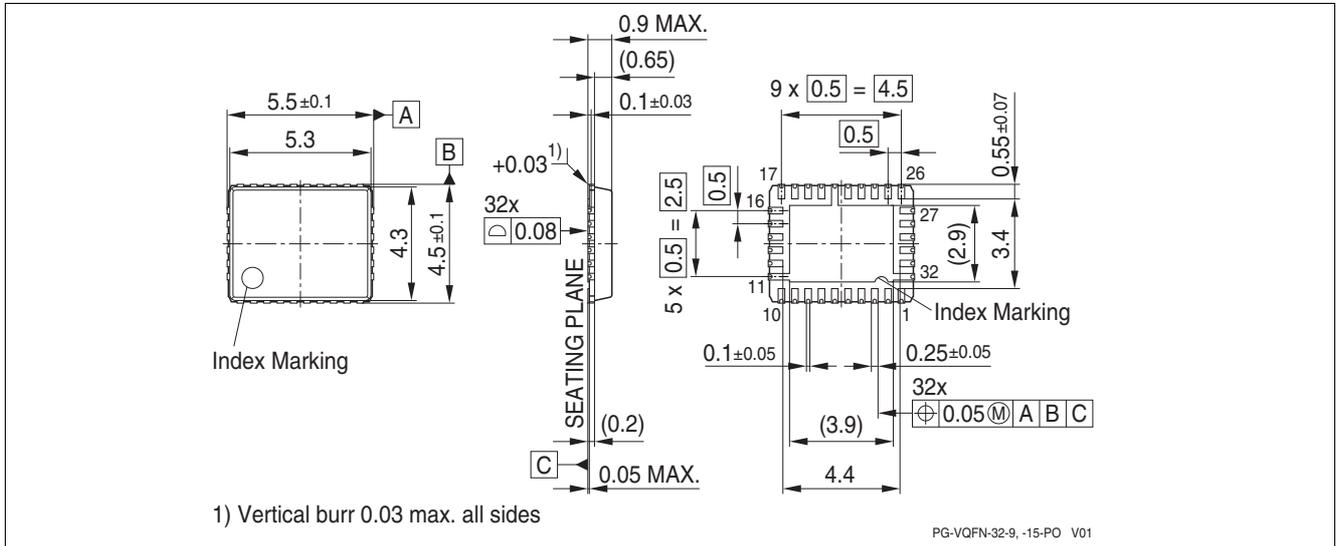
Package Outline (Top, Side and Bottom View) of VQFN32-9
